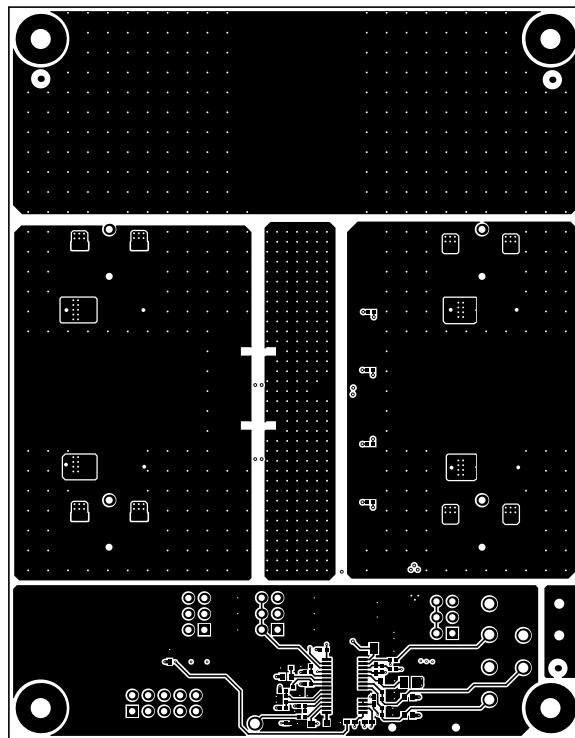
LM5066H1EVM Board: Inner Layer - 2
